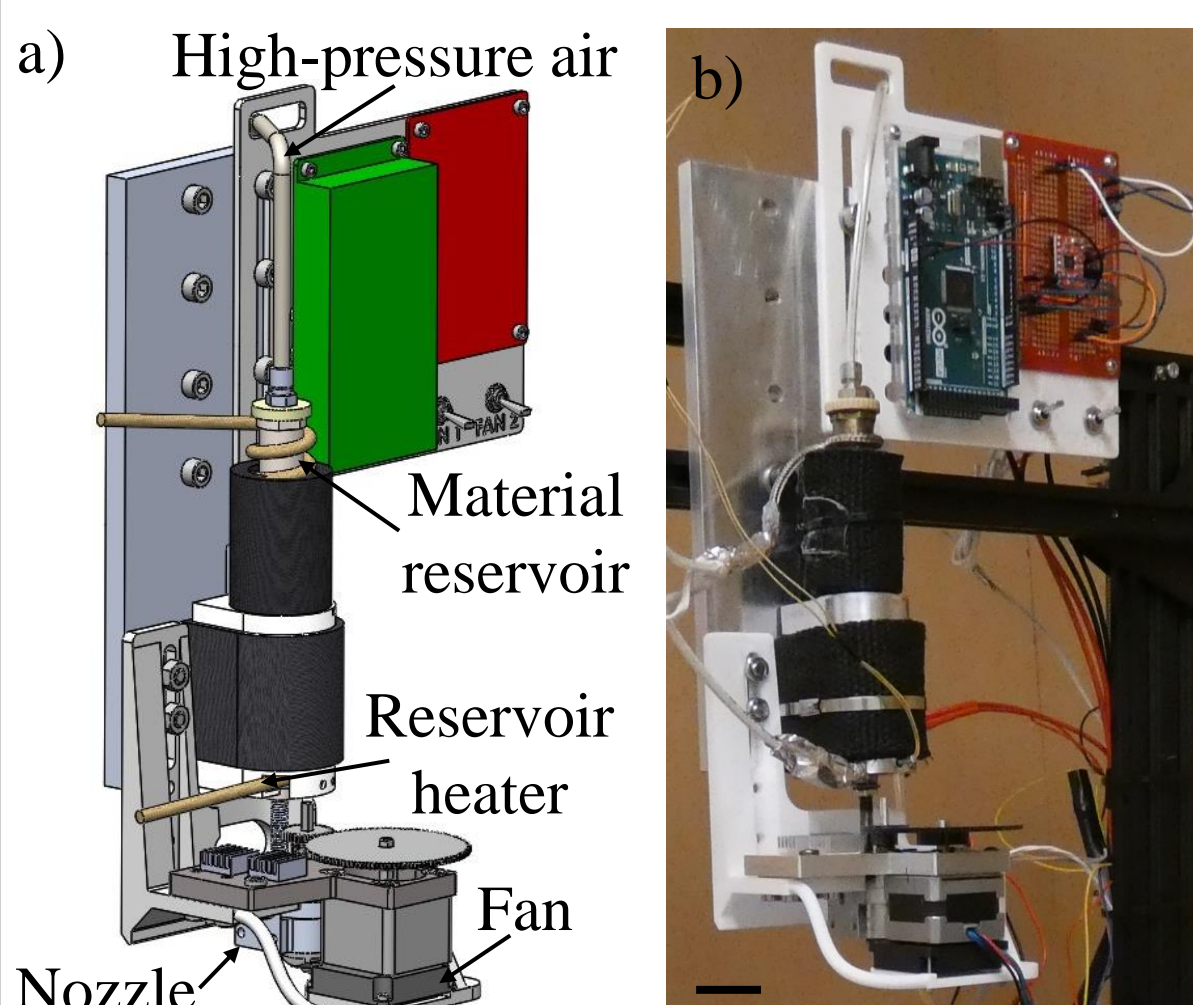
a) Computer aided model and b) final assembly of printhead system (scale: 25 mm).
